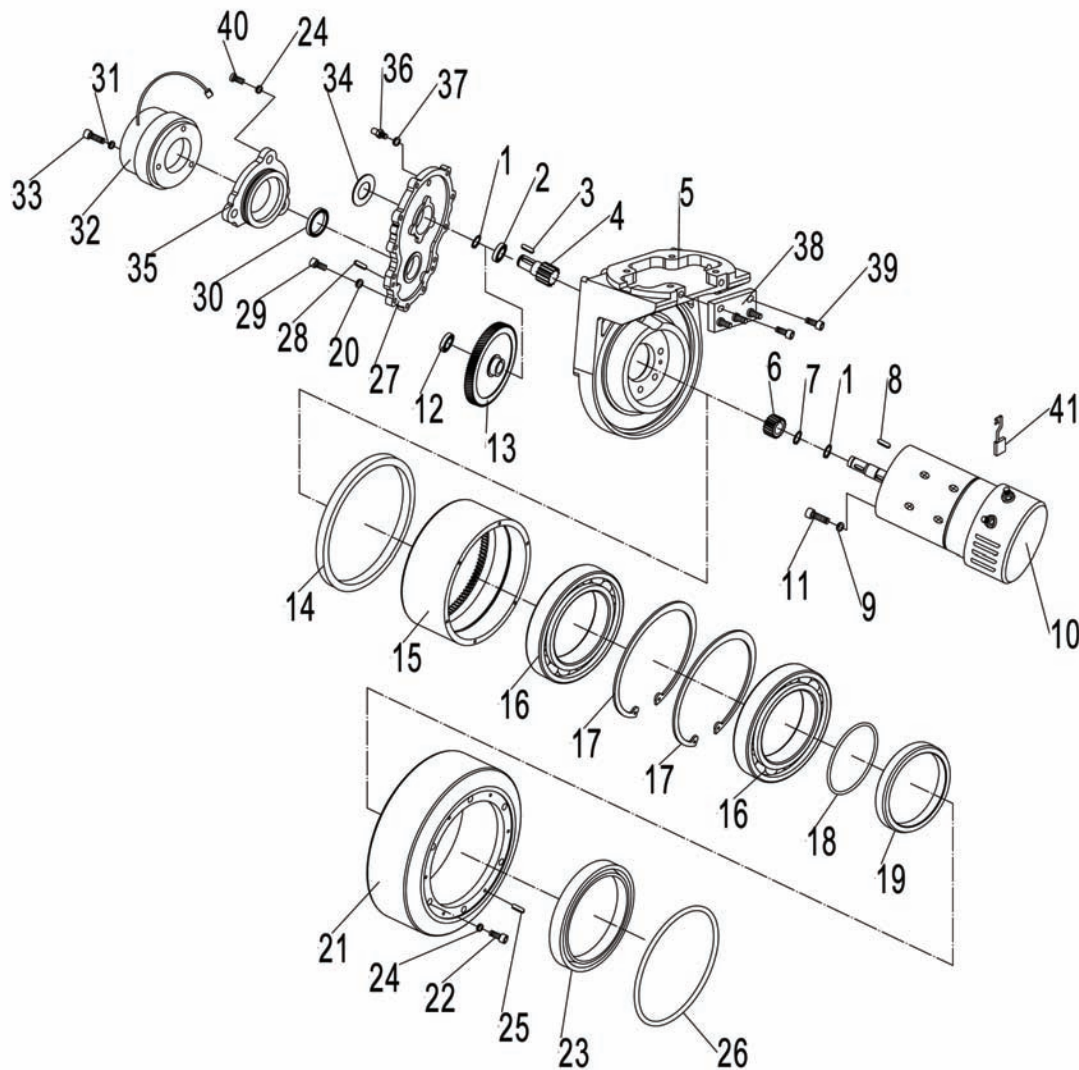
Repair Parts Illustration for Driving Wheel Unit
